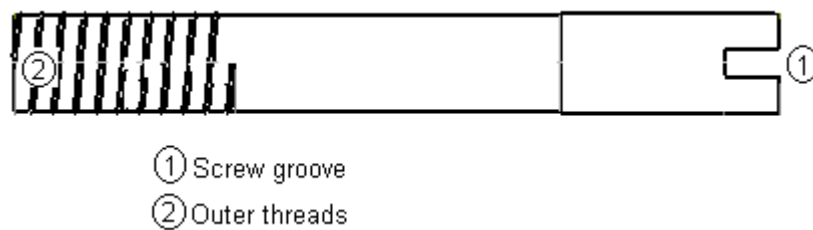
The inner screw, having threads only on the leading edge of the screw and a driving slot at the trailing end of the screw
